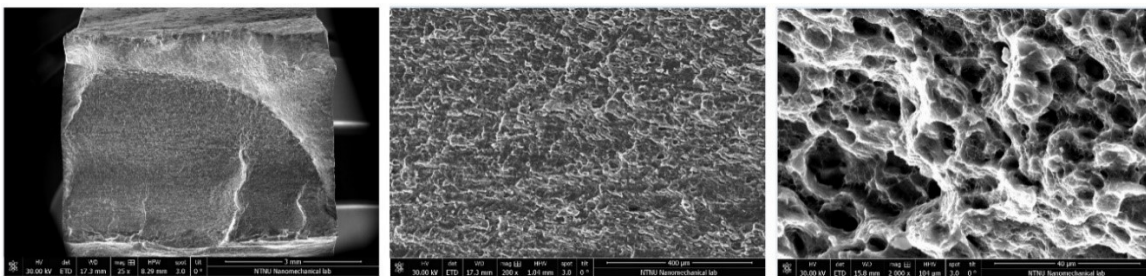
Fractography of a selected welded specimen broken under cyclic load.
